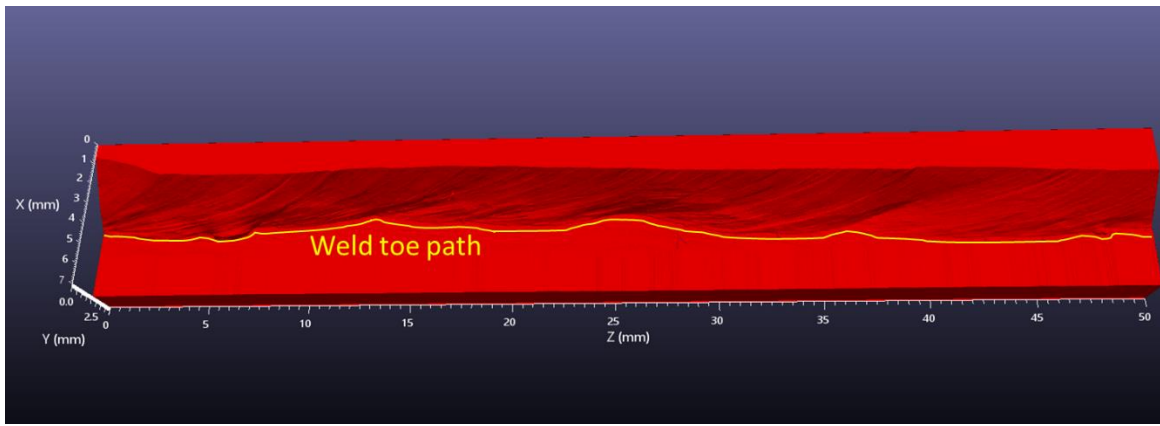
Entire weld volume with the irregular weld toe path highlighted in yellow. Specimen - T15.
